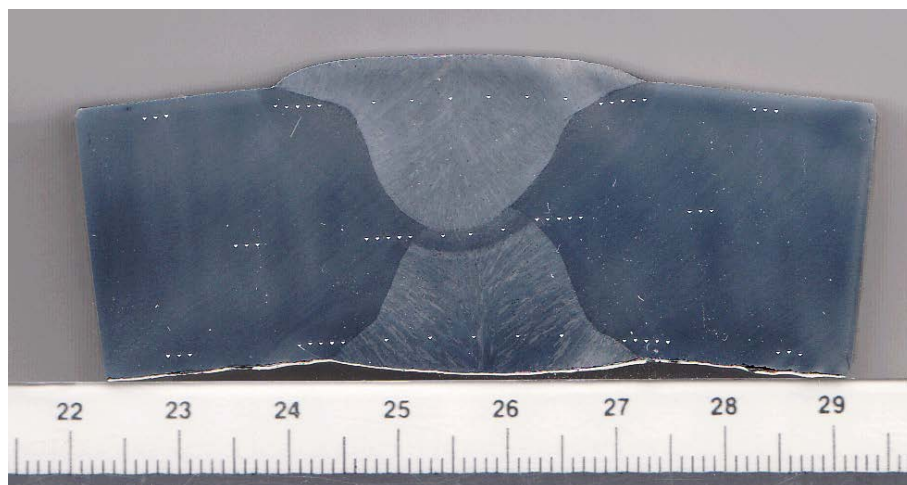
Macrograph of the longitudinal weld in S-X65 with residual imprints from hardness measurements.
